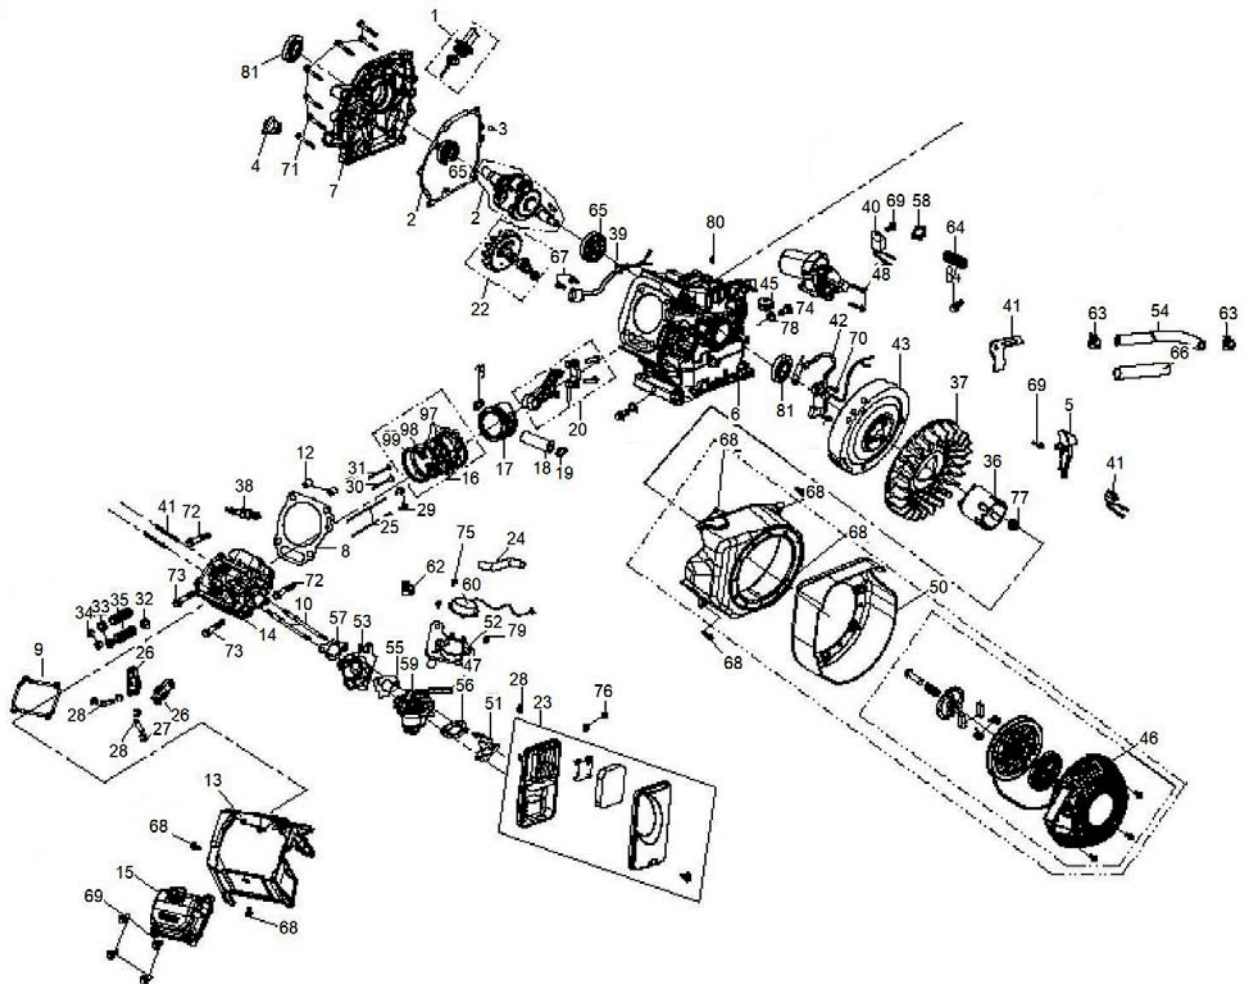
Spare parts drawing 6 PG-I 42 SE
